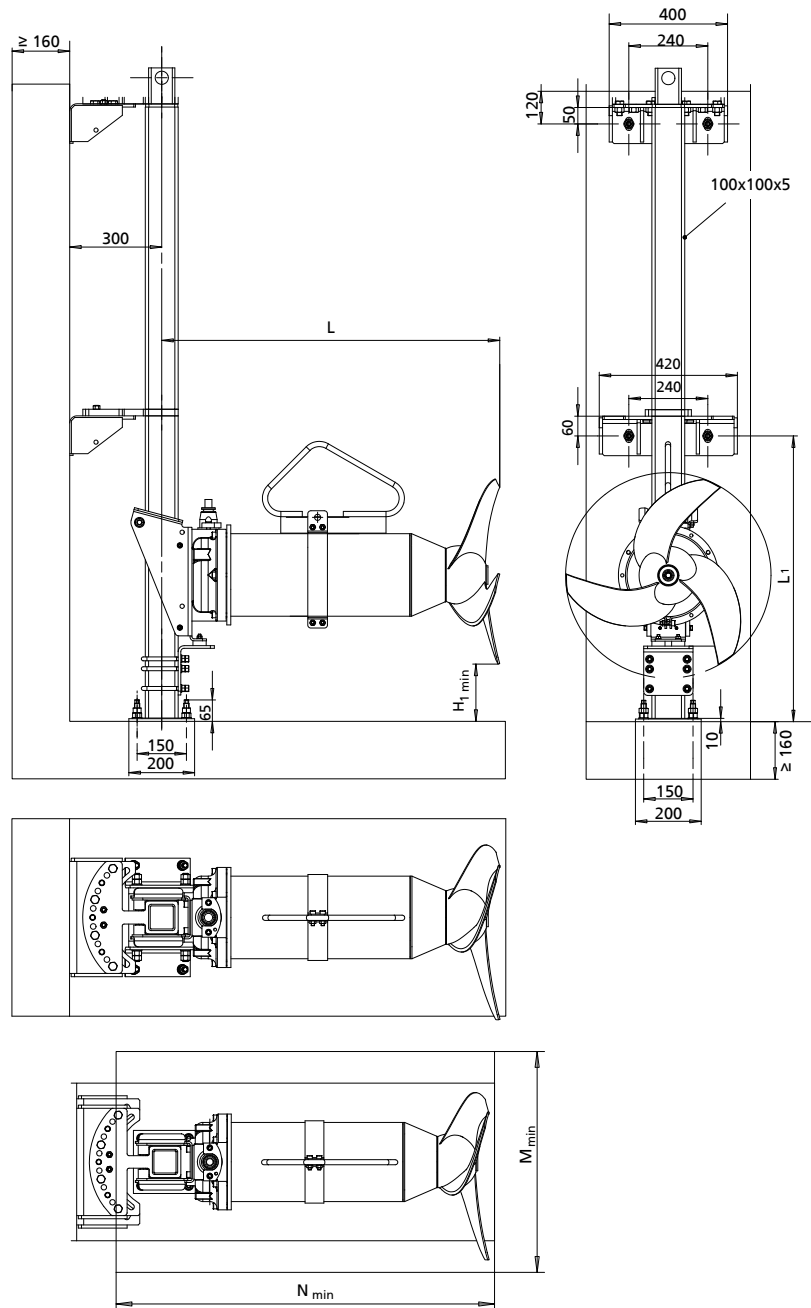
Installation with accessories 22 - Amamix 400 (size 4135 only) / 600
